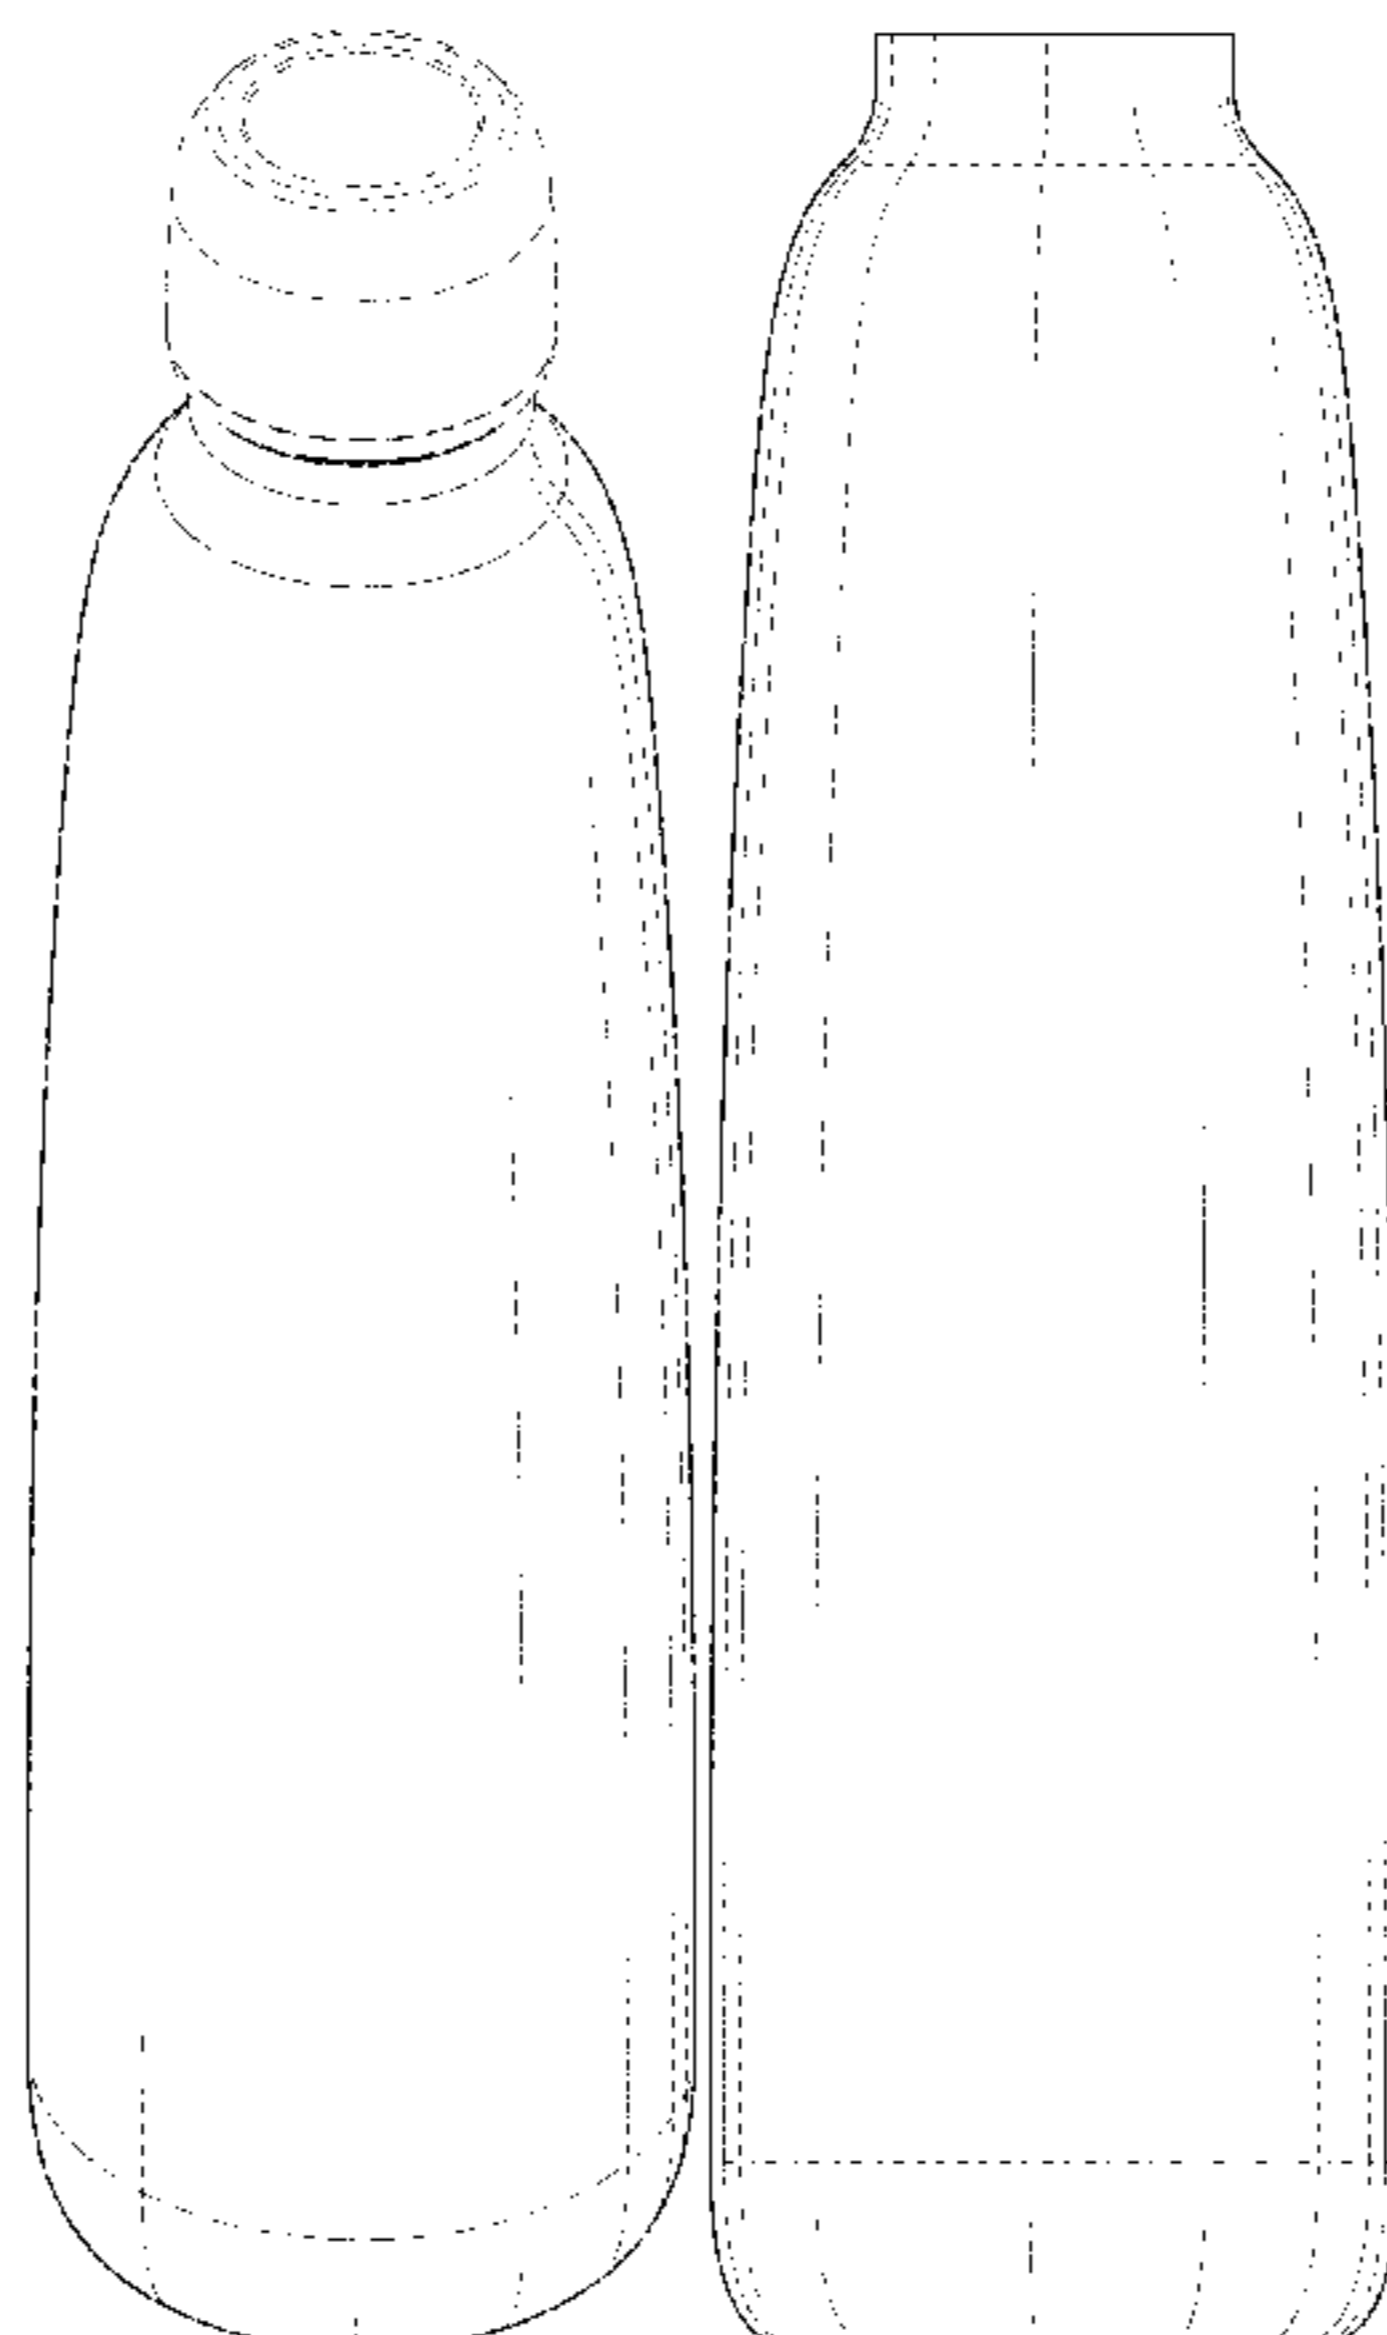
is a front view of the bottle shown in FIG. 7, with the left side view, right side view, and rear view being mirror images thereof;
